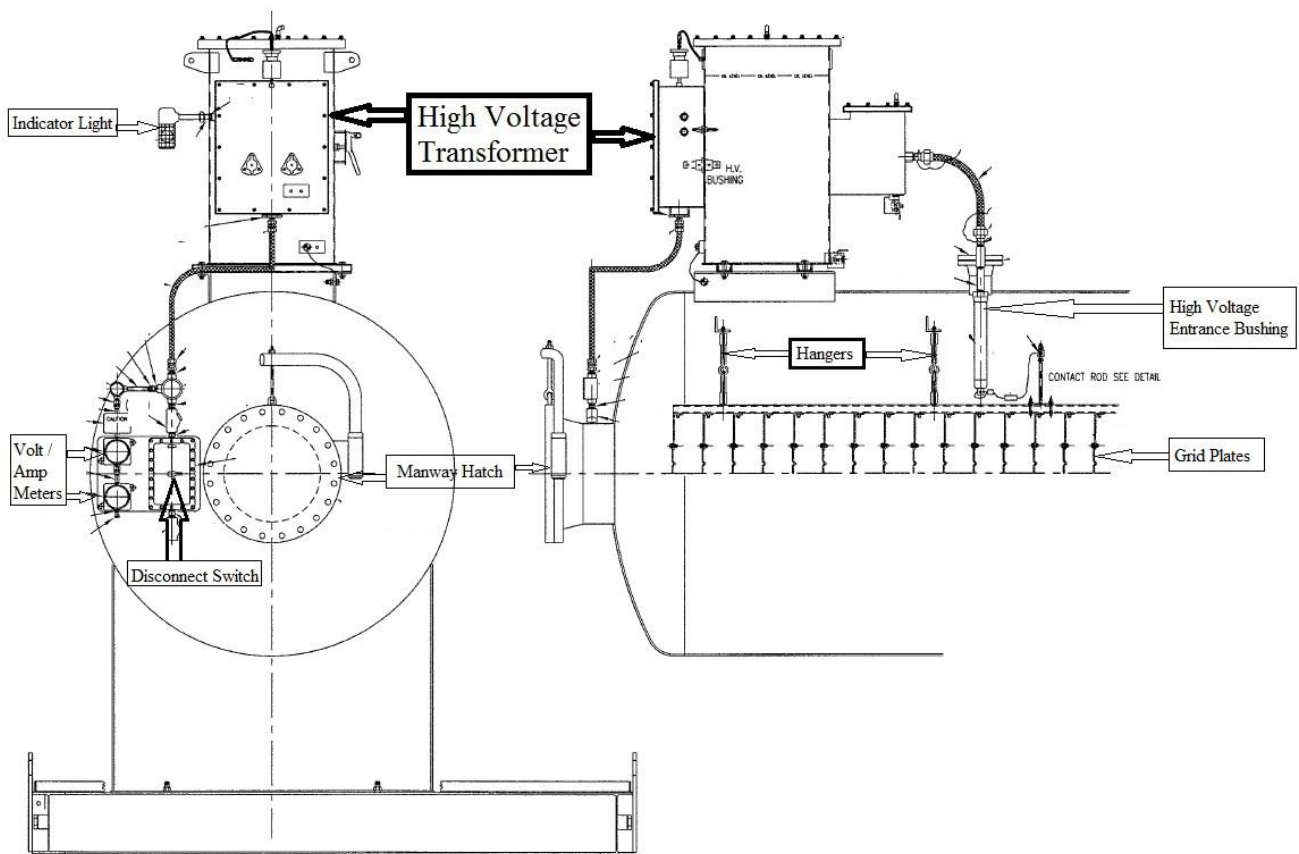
Coalescing Section of Heater Treater – Front and Side Views – Edited for Relevance and Simplicity
